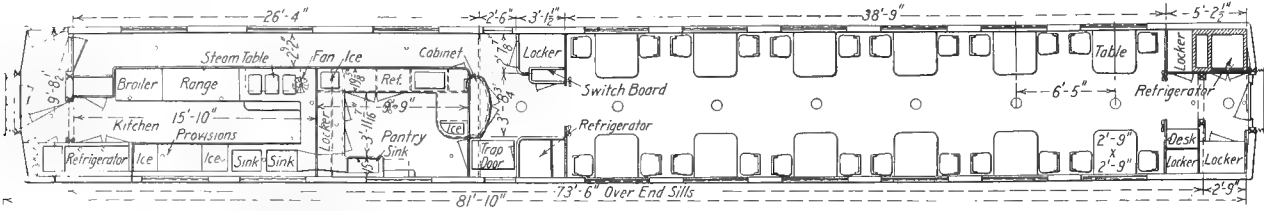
Floor Plan of Atlantic Coast Line Dining Car.
